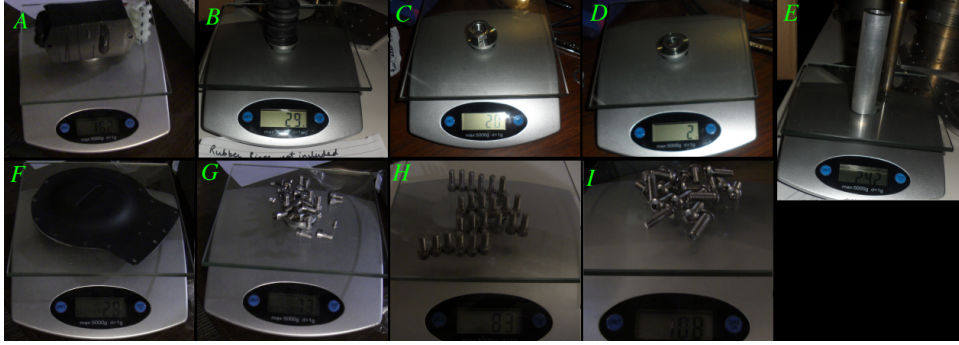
Mass measurements: A. Capacitor B. Rubber Rings C. Bolt Assembly Nut D. Bolt Assembly Washer E. Bolt Assembly Screws and Spacer F. Waist Motor Cap G. Waist Bracket Screws H. Waist motor to side plate screws I. Side Plate Screws
